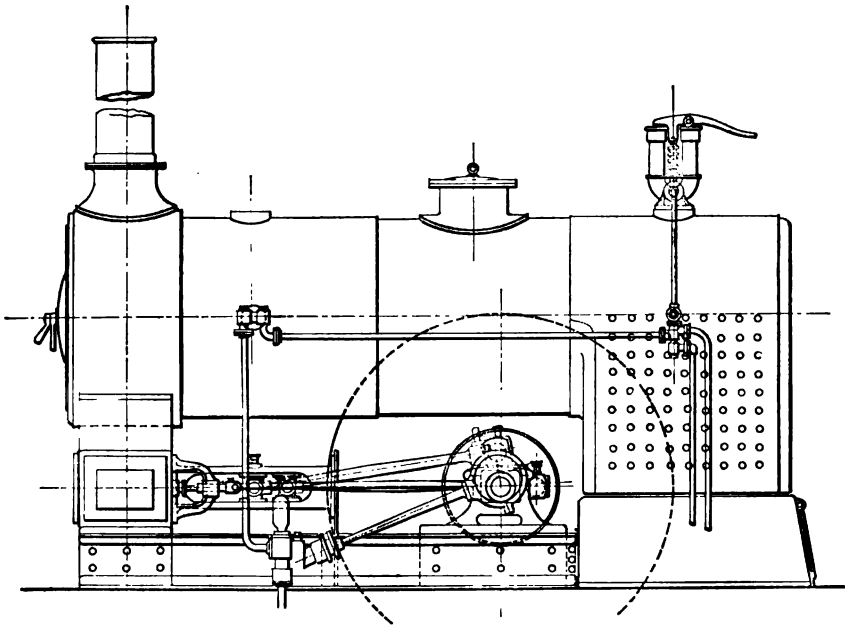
SIDE ELEVATION OF A COMPOUND UNDER-TYPE ENGINE.
